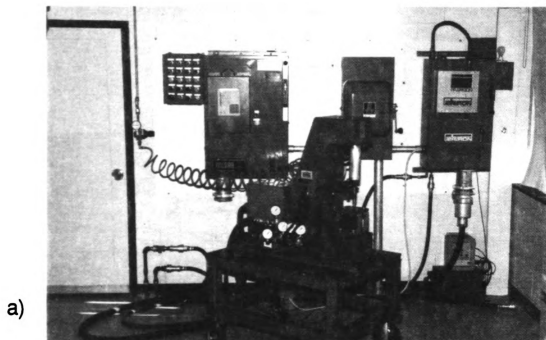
Photographs of laboratory spot welder.
